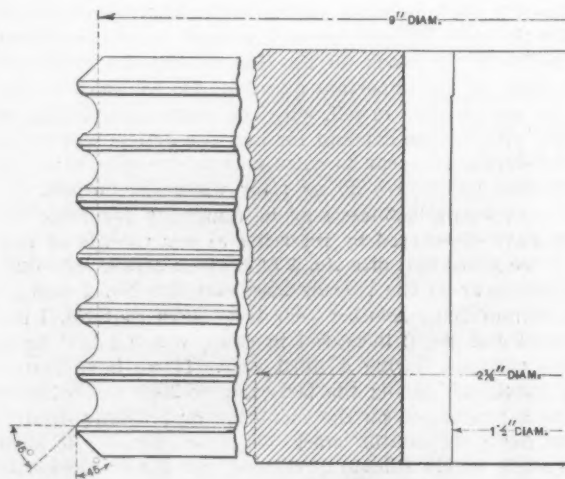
A Six-Groove Roll for Covering Several Wires at Once.
